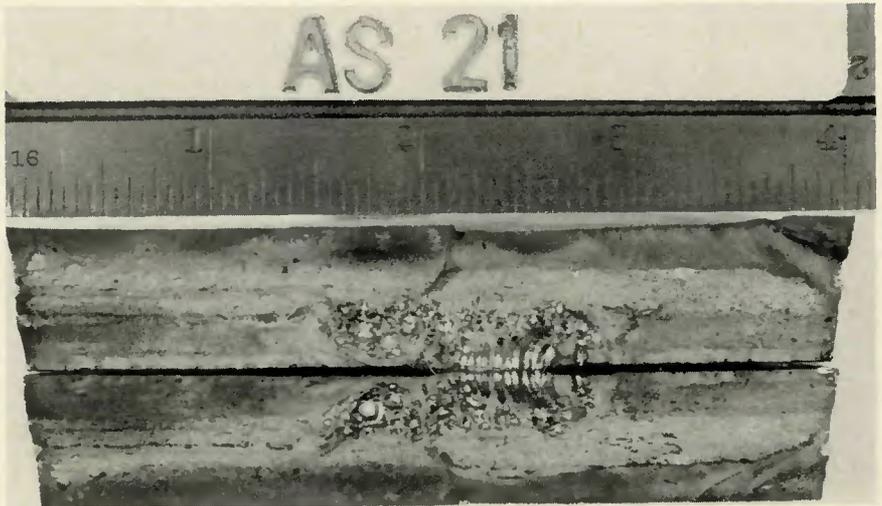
Typical fracture surface passing through a cluster porosity
